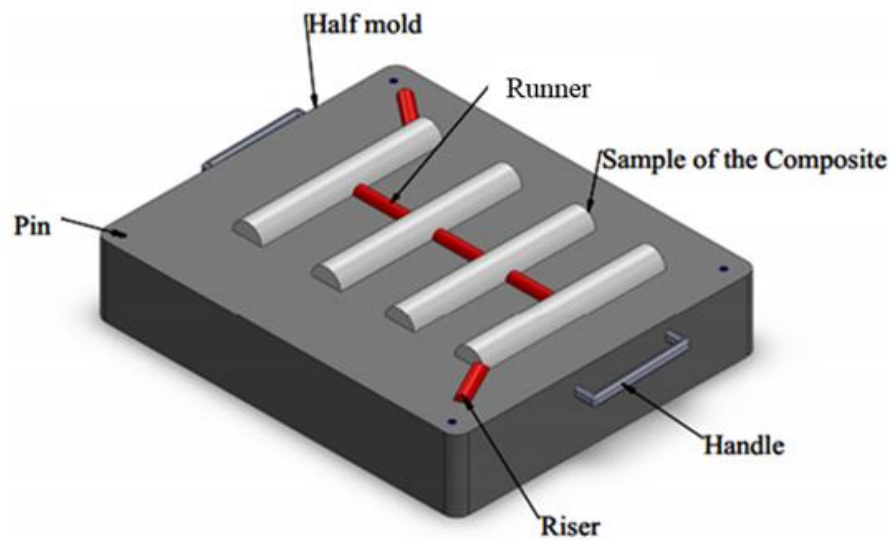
5. Sand Mold Box Used for Making Tensile Test Samples
